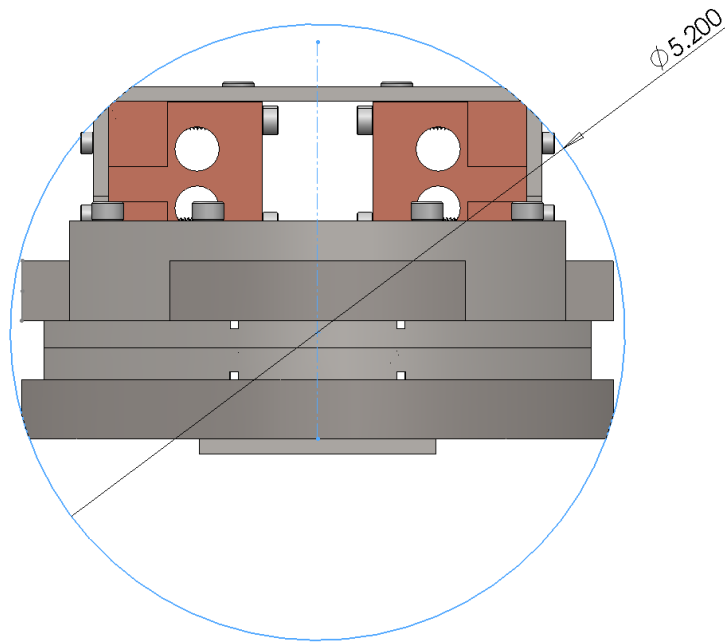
Front view of the cable assembly with chamfers shown.
